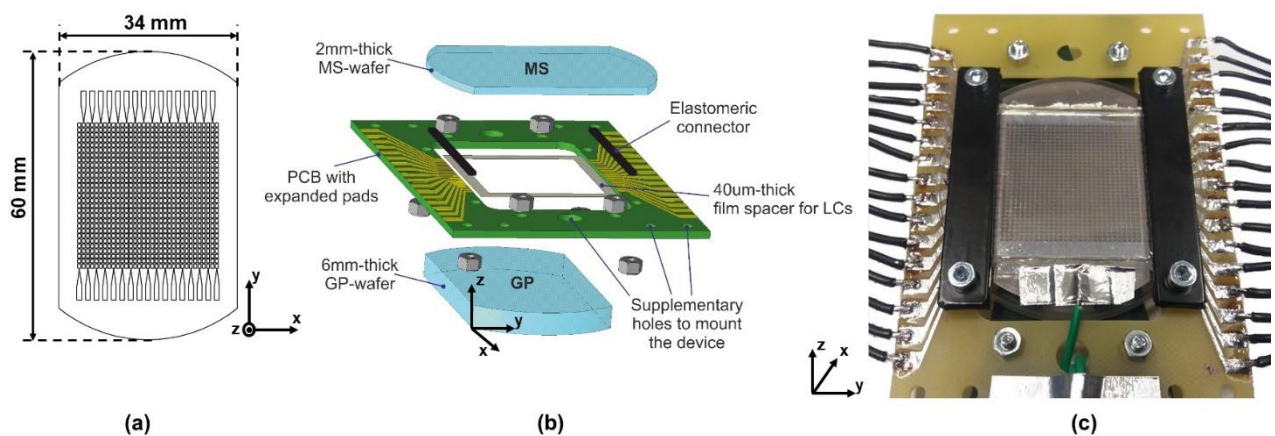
(a) Schematic representation of the manufactured RA: (a) front view of the 2-mm-thick quartz wafer with active patches (MTS) and contact pads. (b) Isometric exploded view of all the pieces composing the RA and showing in the center the PCB used to realize the bias connection. (c) Photo of the assembled device prepared for connection to a 33-channel voltage generator.
